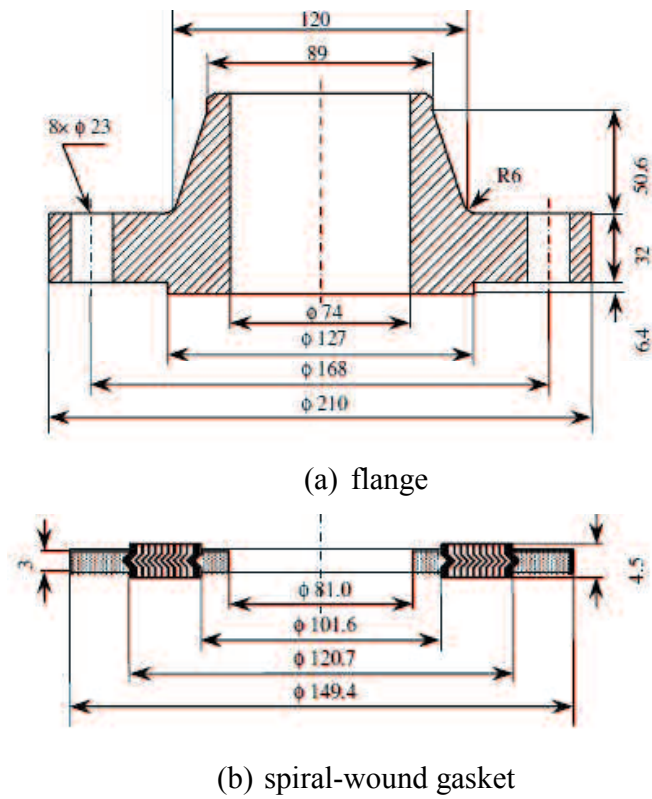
Dimension of the flange and gasket used in the FEA (Adapted from [3])
